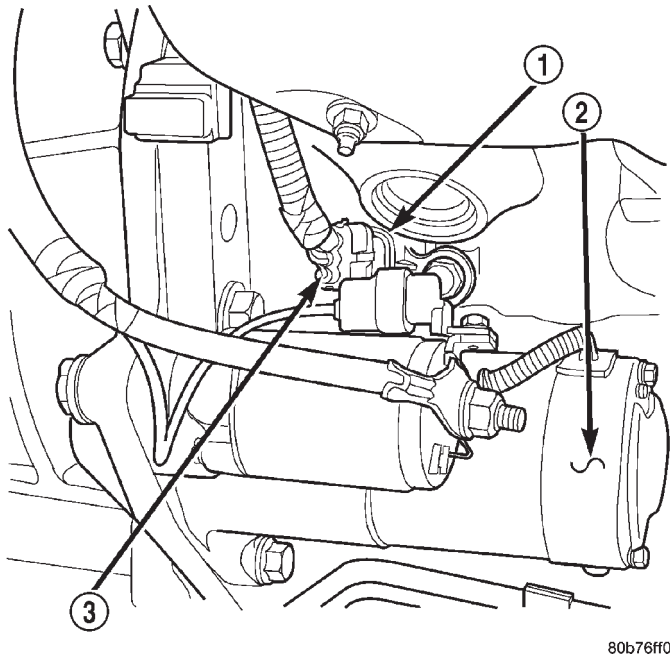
CKP Sensor Location—4.7L V-8 Engine
